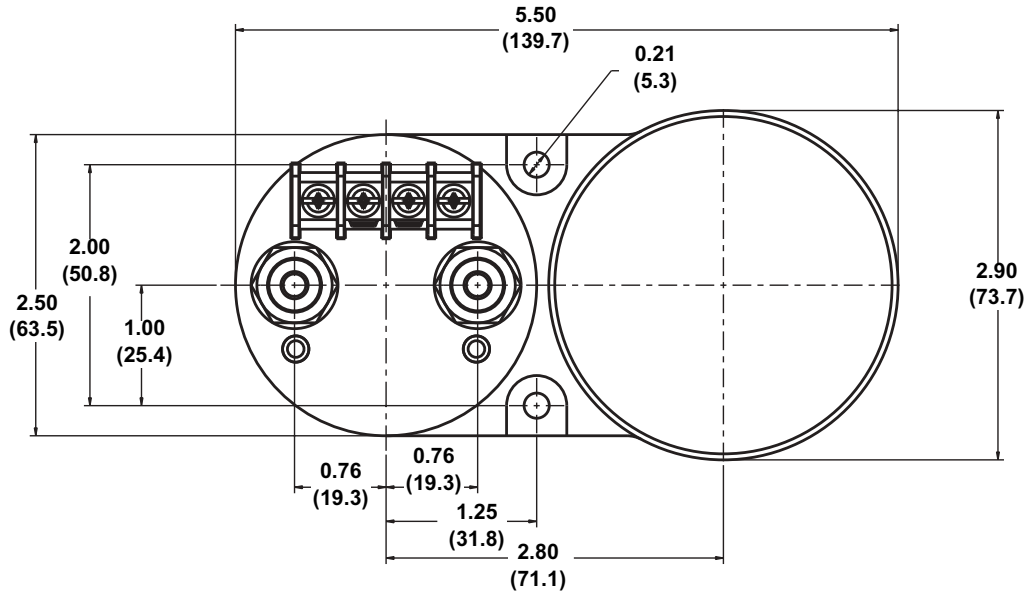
Rosemount 951 Dry Gas Pressure Transmitter Panel Mount Dimensional Drawings
